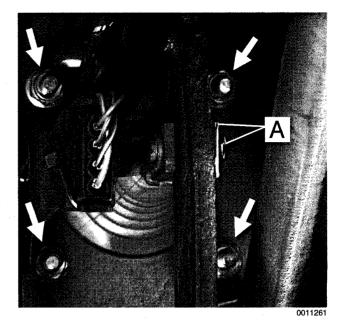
Brake pedal clevis pin and retaining clip (A). Brake booster mounting nuts shown at arrows.
